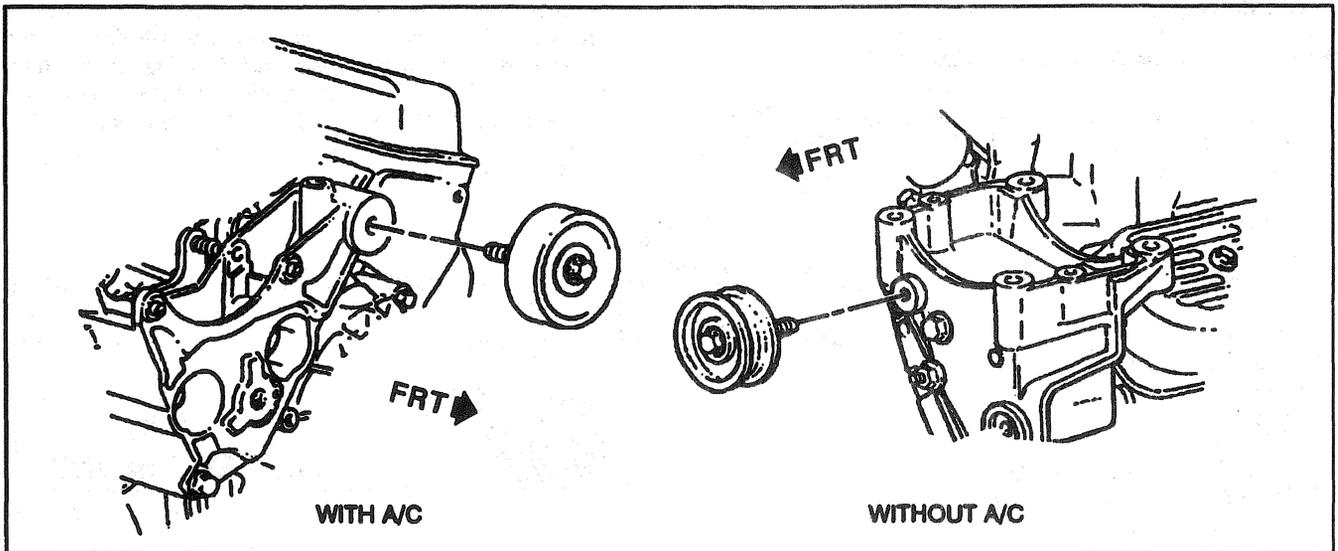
Idler Pulley (4.3L, 5.0L, and 5.7L Engines)
